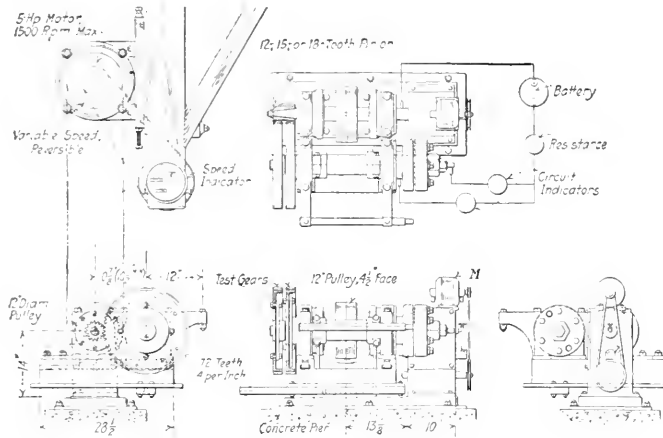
THE LEWIS GEAR-TESTING MACHINE
